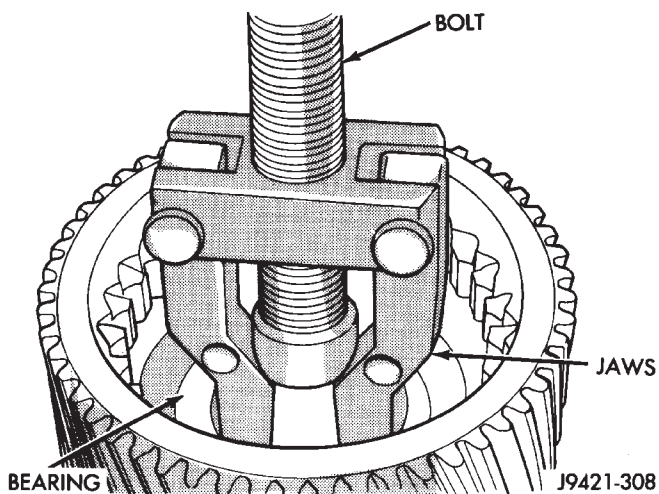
Puller Bolt And Jaws Seated Under Pilot Bearing
